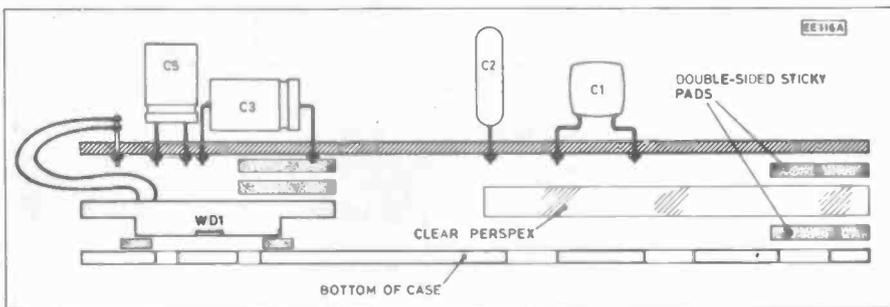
Arrangement for mounting the printed circuit board in the case.
